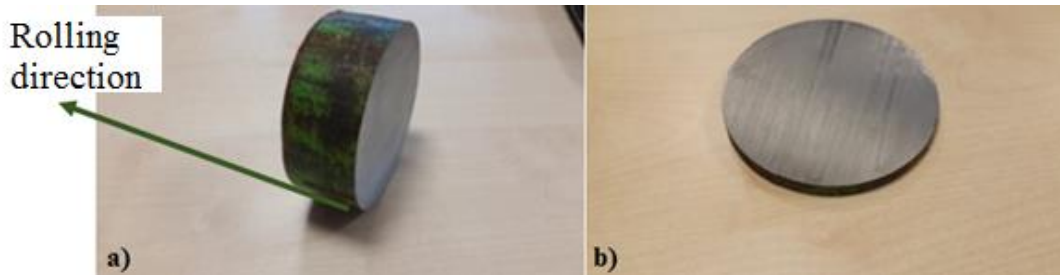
a) Rolling direction of DIN 22NiCrMo2-2 billet b) Billet sample which is used for macro analysis
